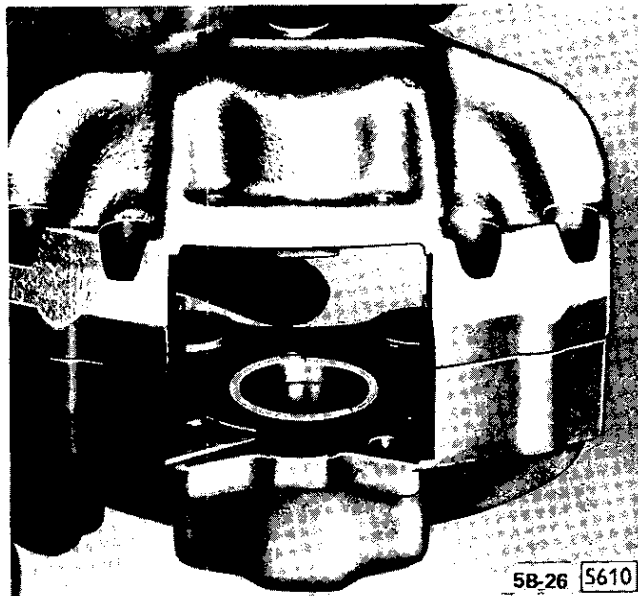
B-26 Removing or Installing Rubber Seal Clamp Ring
